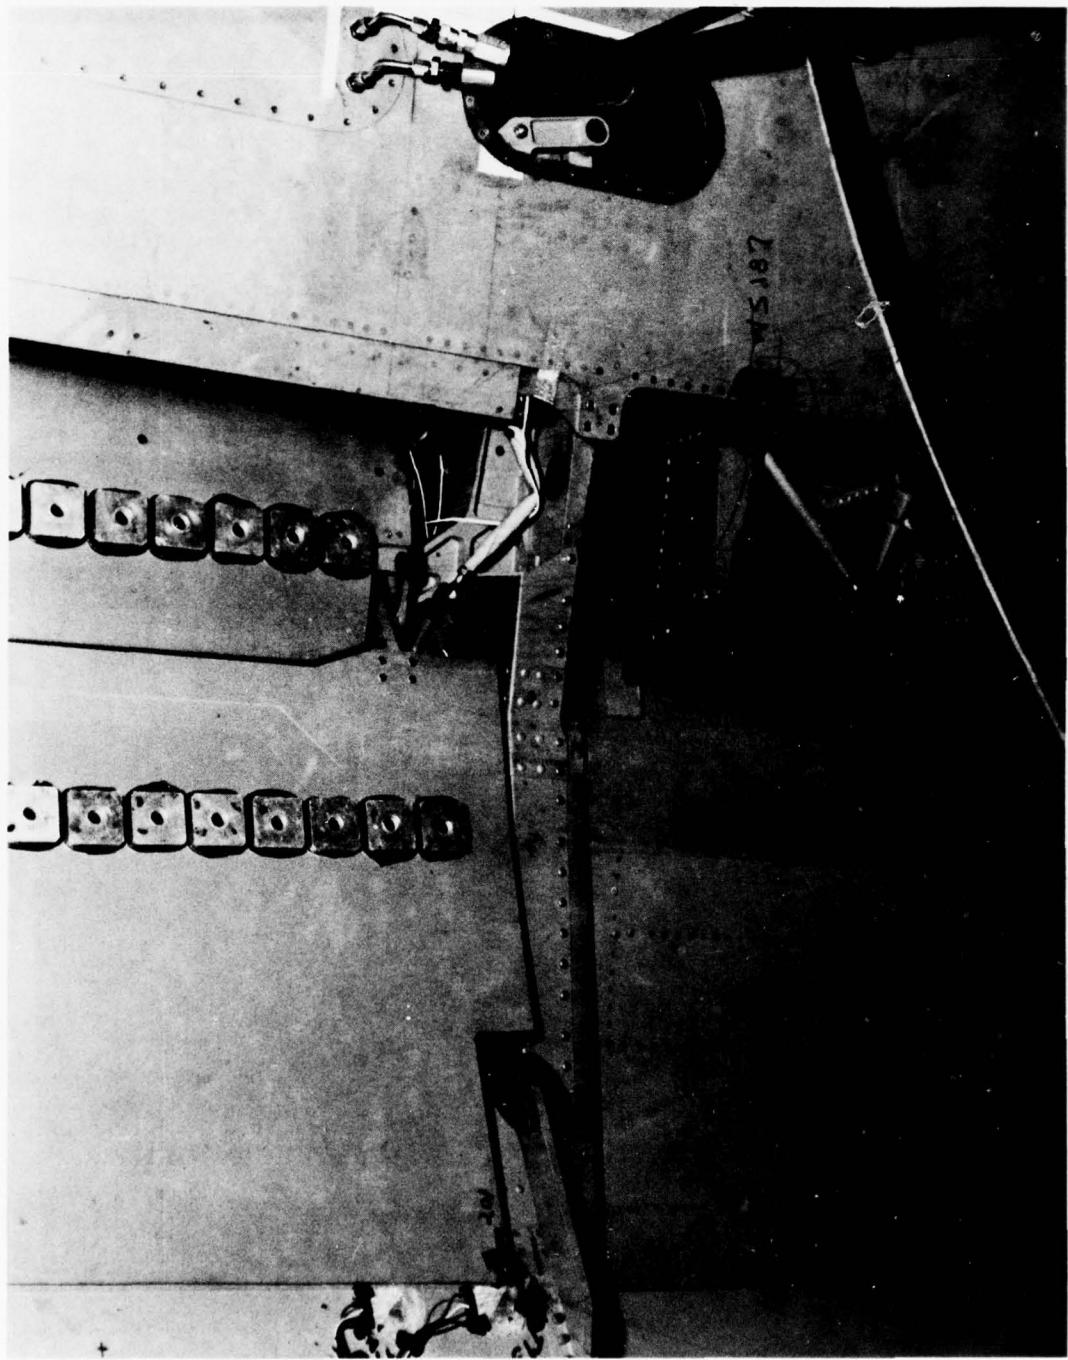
Failed Trim Tab Drive Pushrod - Part No. 160C622007
